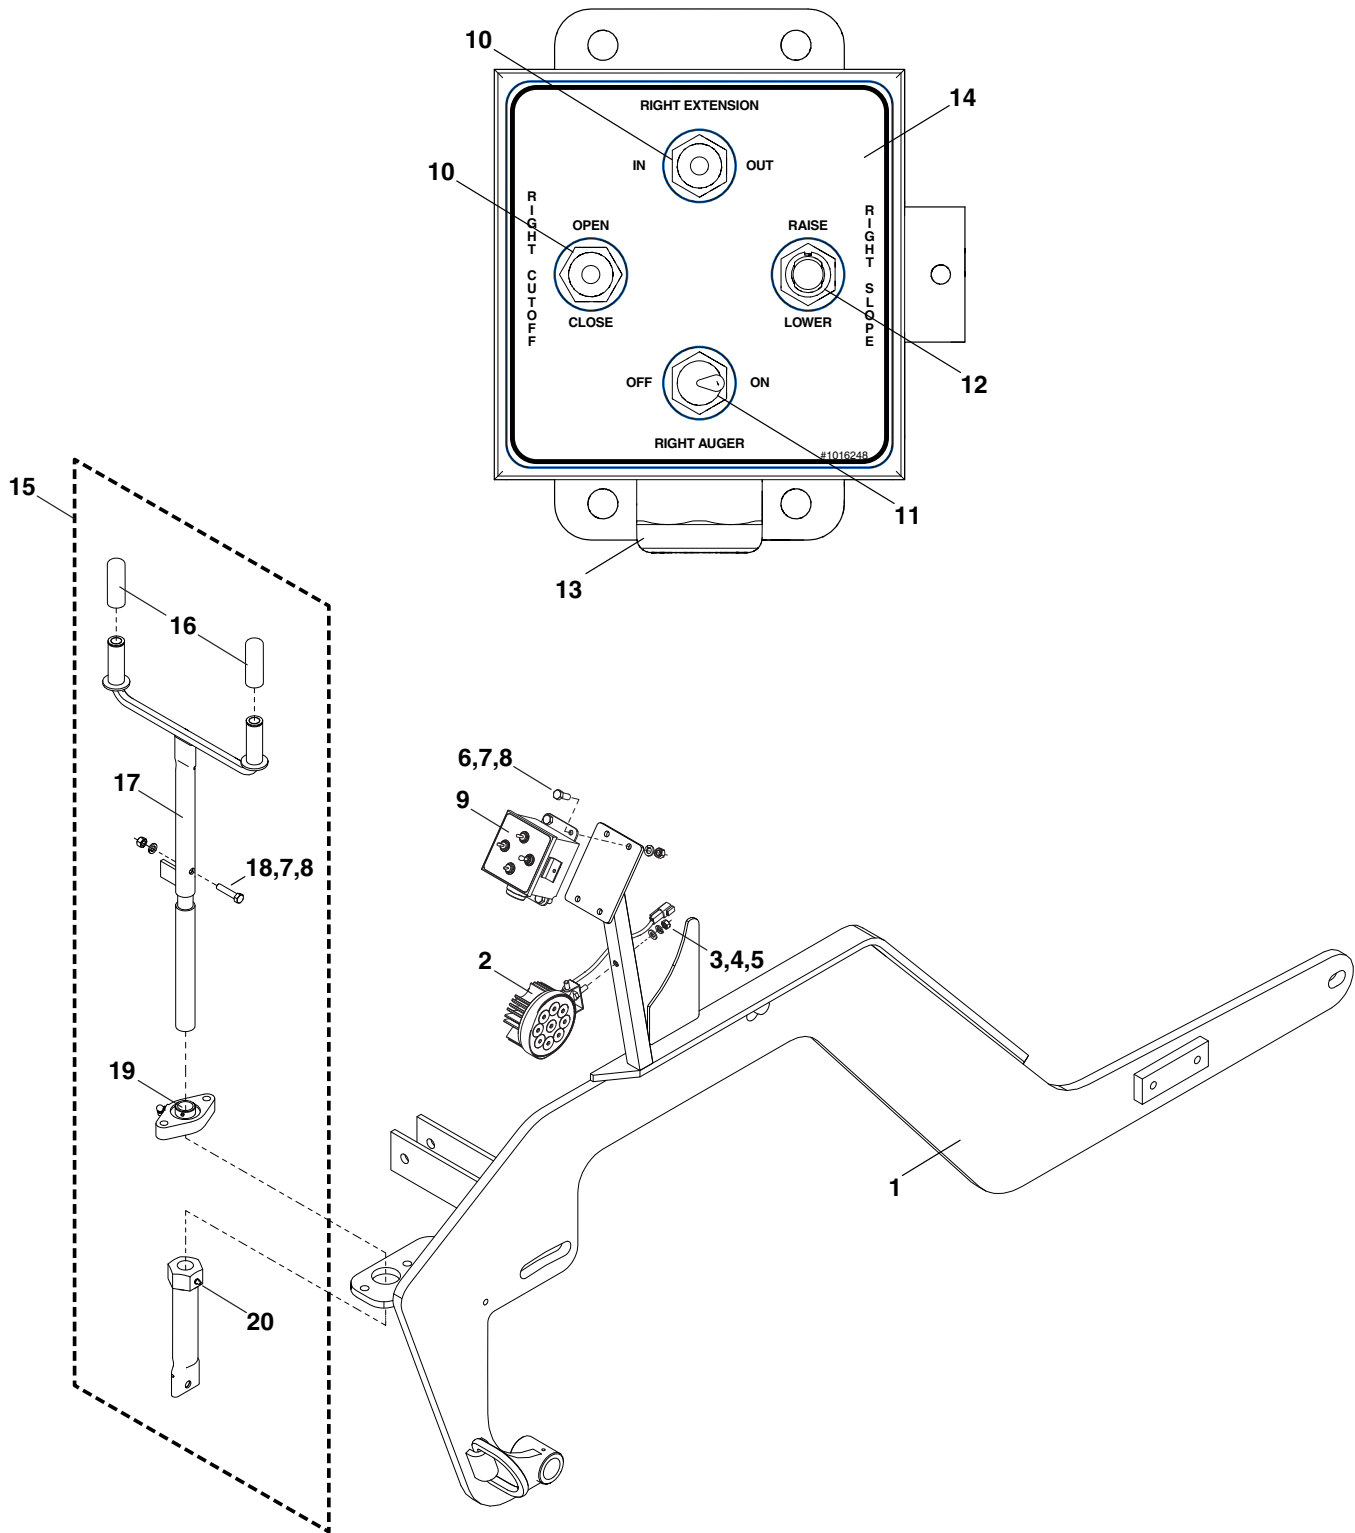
Option - Legend Screed Pull Arm Assembly - Right
